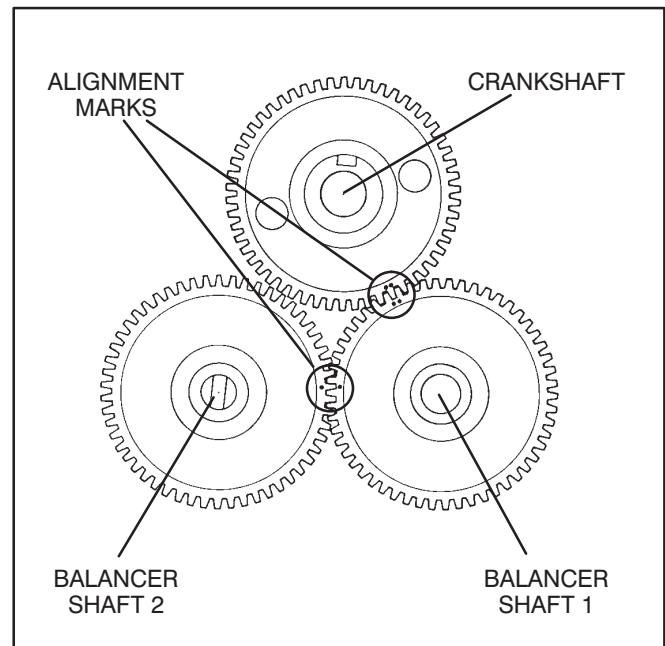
BALANCER SHAFT ALIGNMENT
